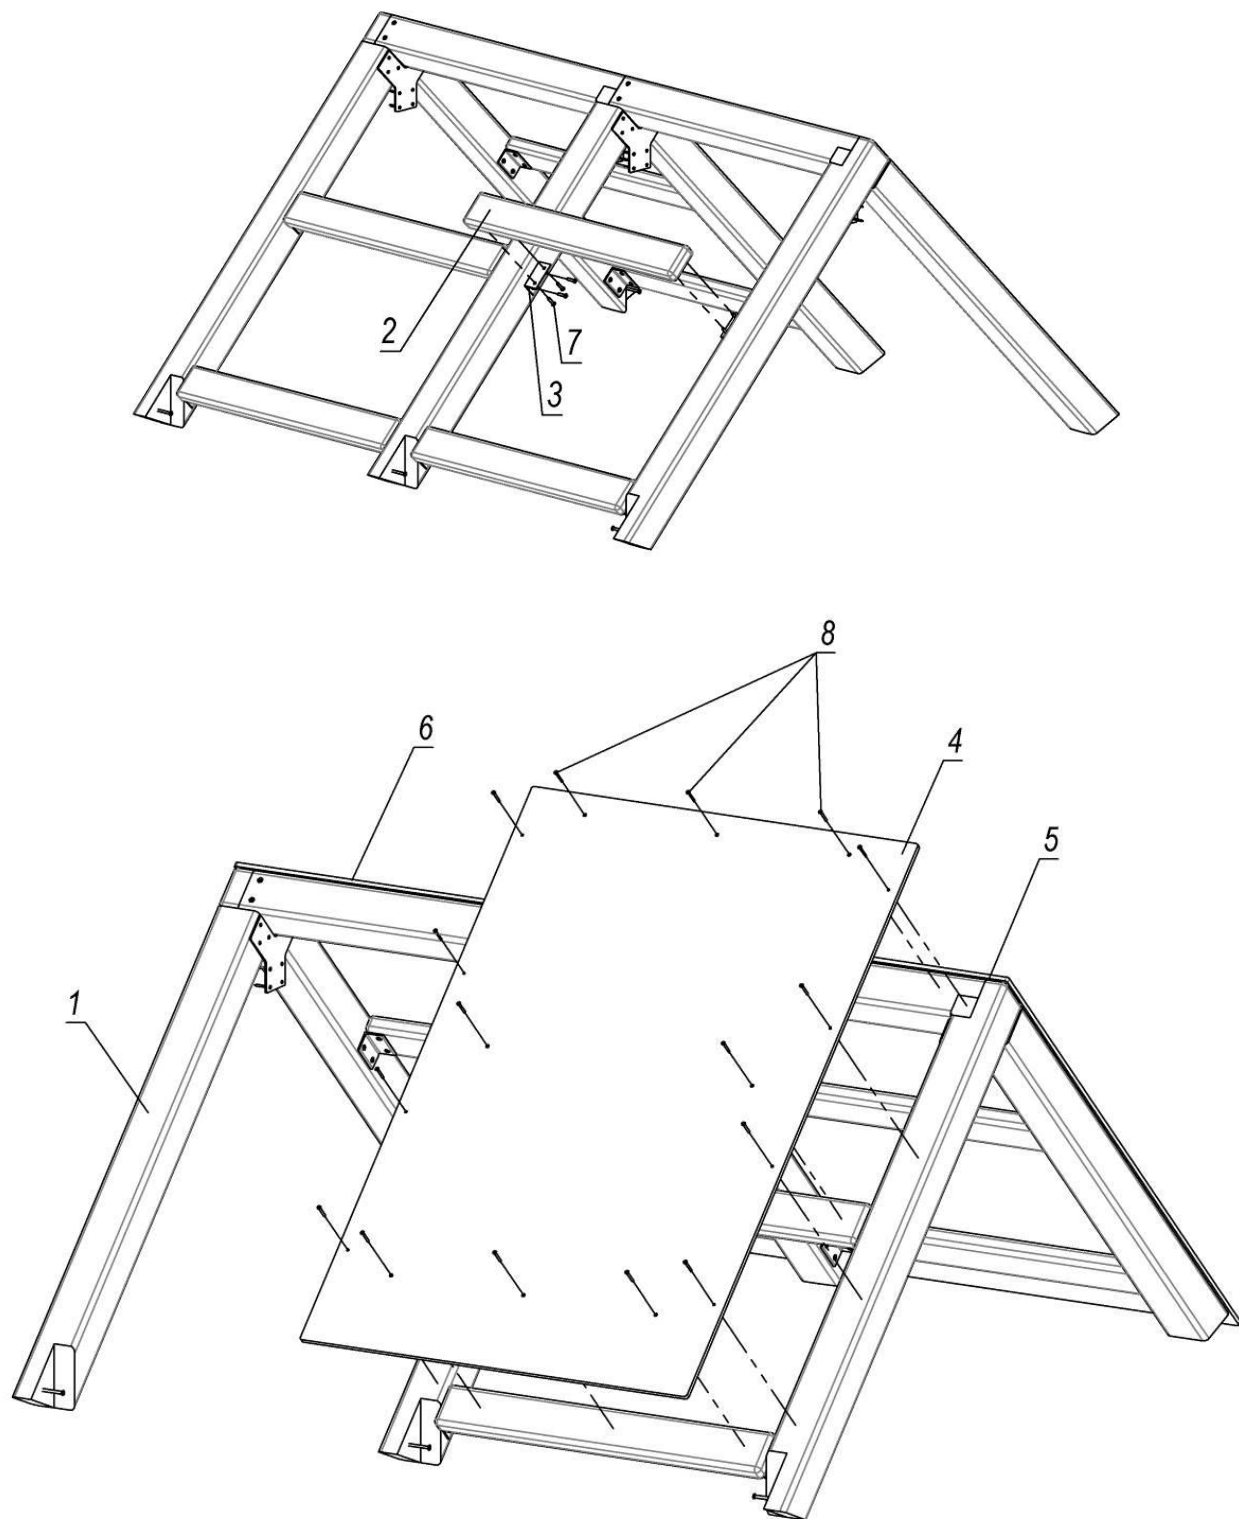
Triple tower. Tower is located under №7 on pic 1
